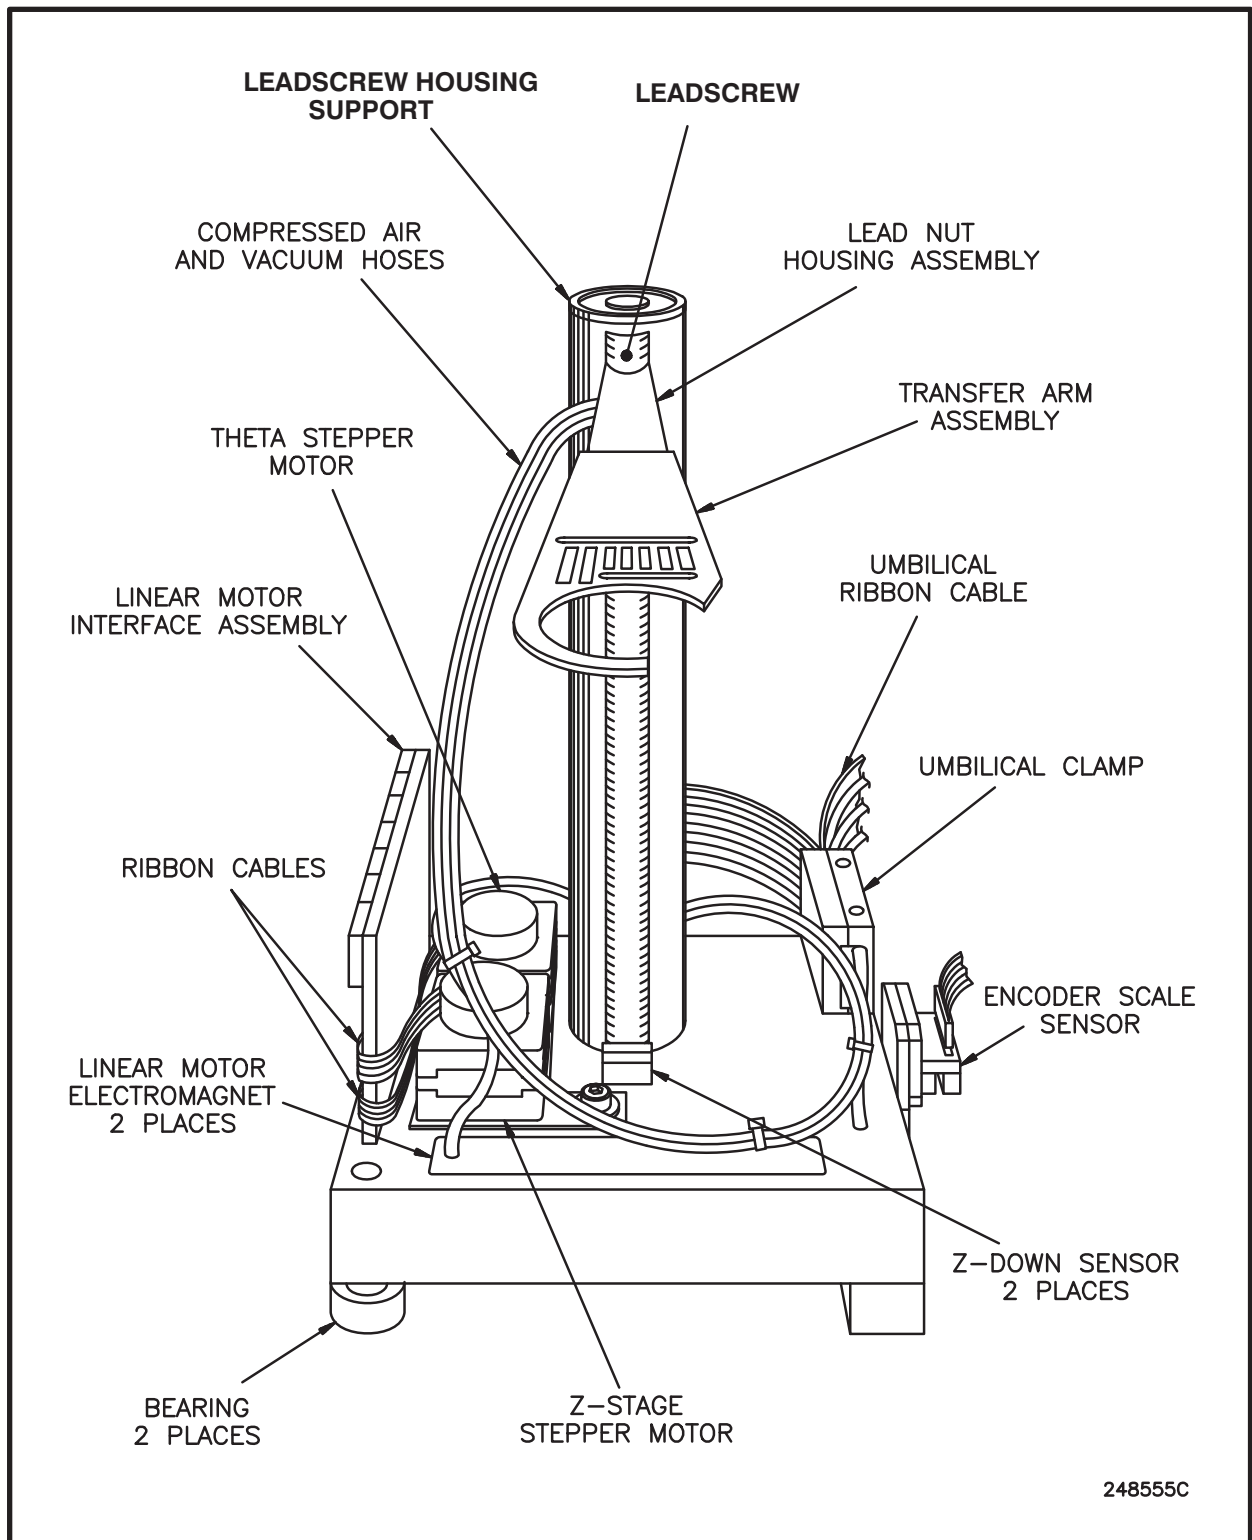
TRANSFER ARM ASSEMBLY
